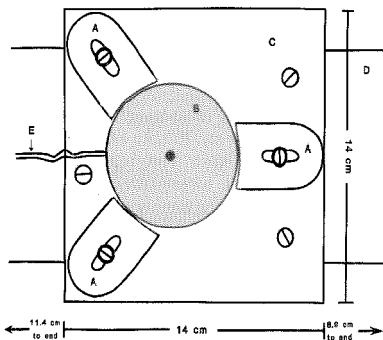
Diagram of motor mount assembly noting position on motor support, top view; A. screw brackets for motor mount, B. motor body, C. plywood base for motor mount, D. motor support, E. wires from motor.
